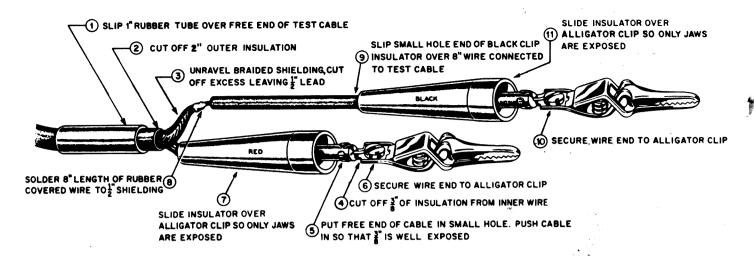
HOW TO PREPARE THE TEST CABLE
